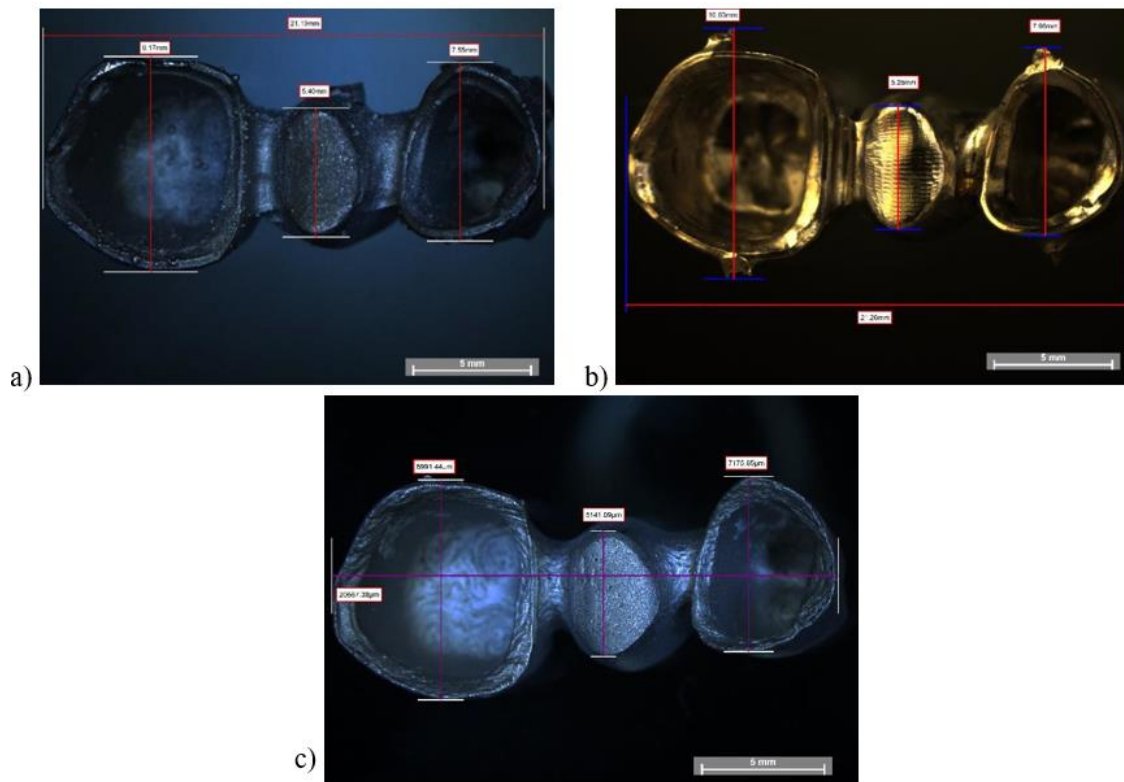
Macroscopic image representing the dimensional analysis of experimental samples obtained by: a) classical casting; b) milling; c)selective laser melting – superior view
